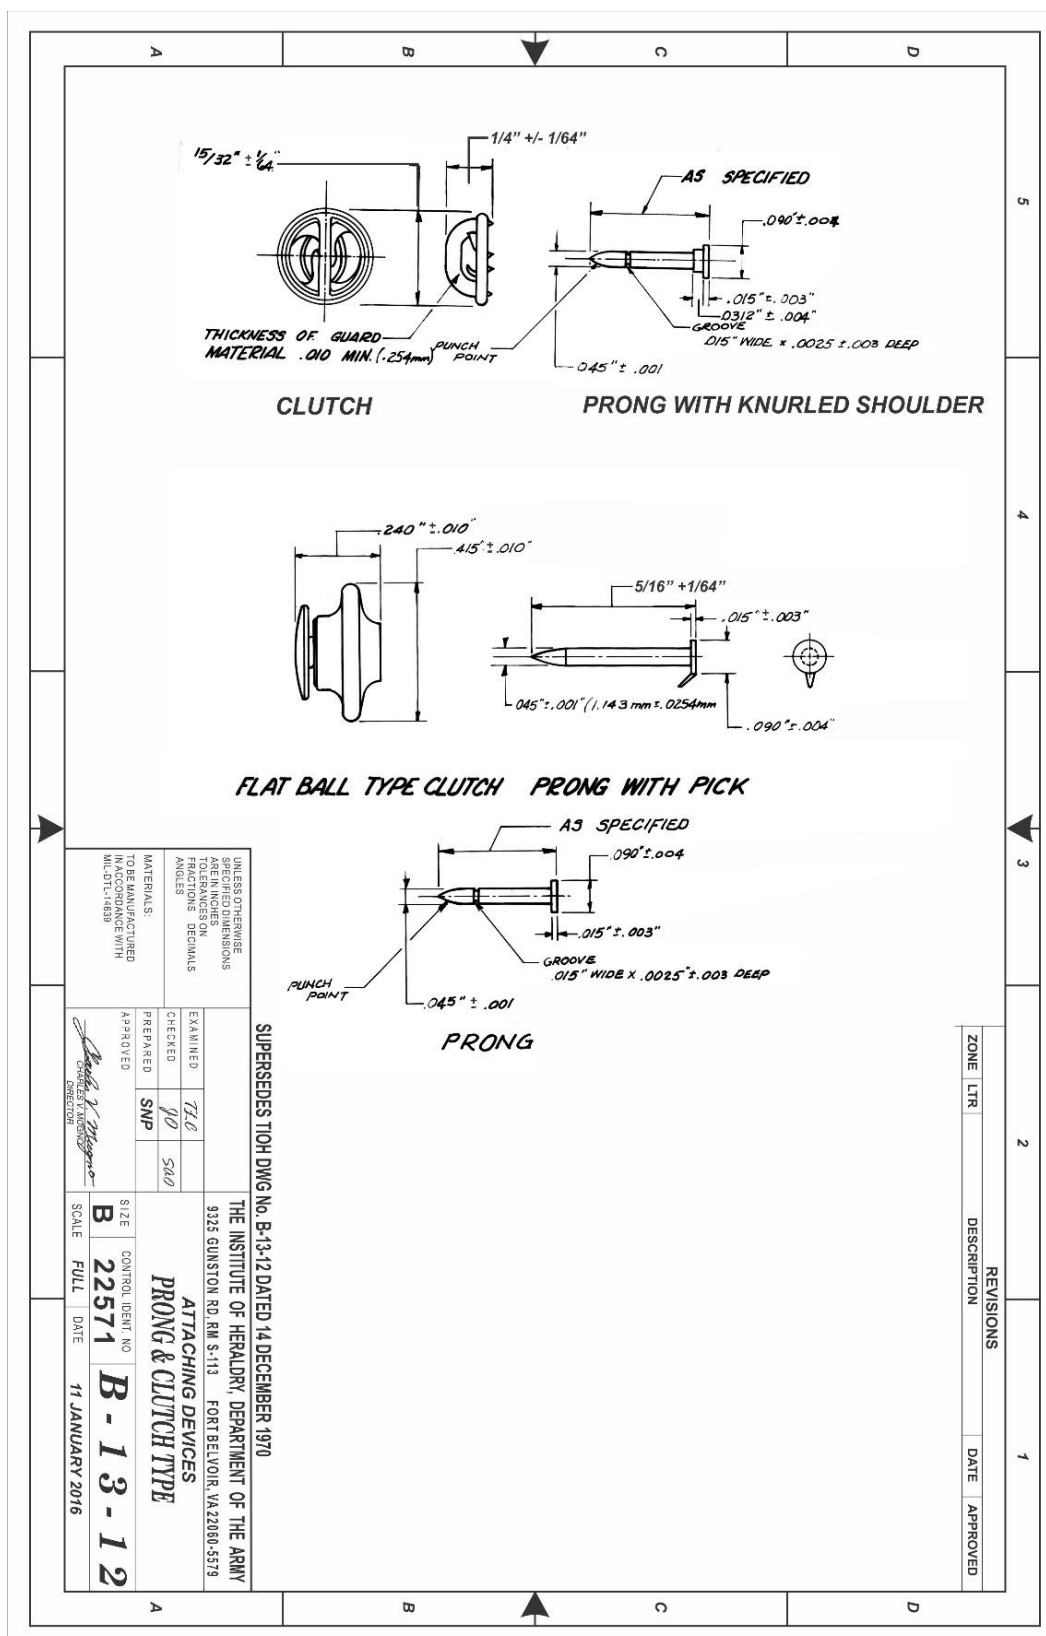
Attaching devices heraldic, prong and clutch type.
